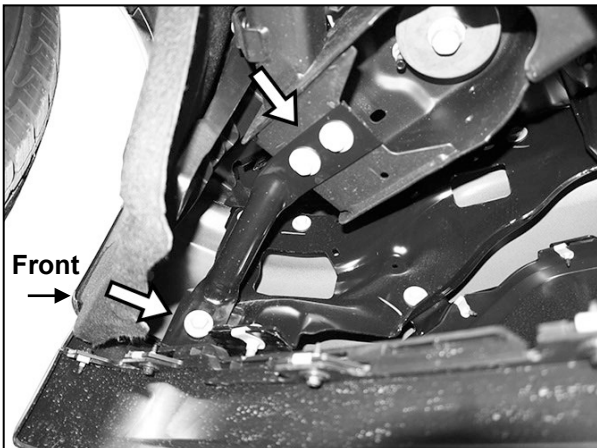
Remove screws behind headlight attaching driver/left front end of fender to fascia body panel (arrows)
